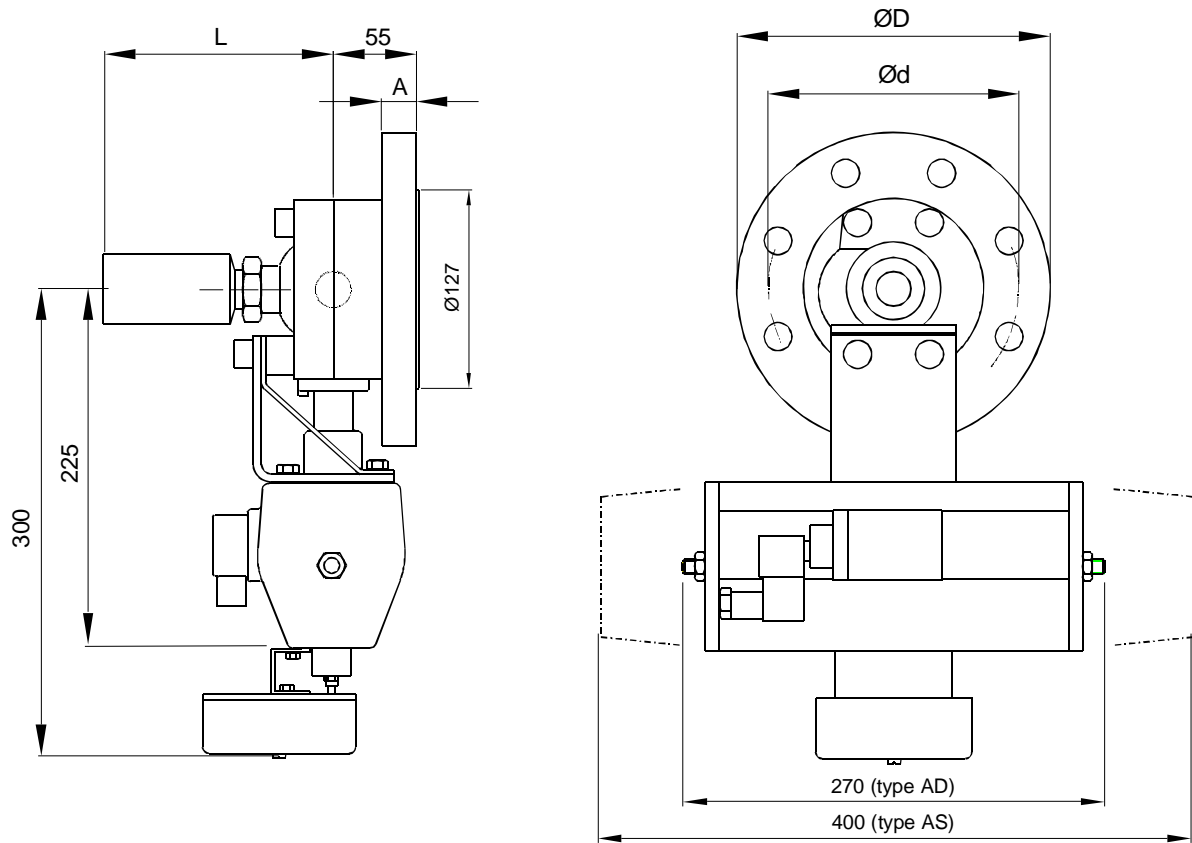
11 Dimensions, Pasve with pneumatic actuator
